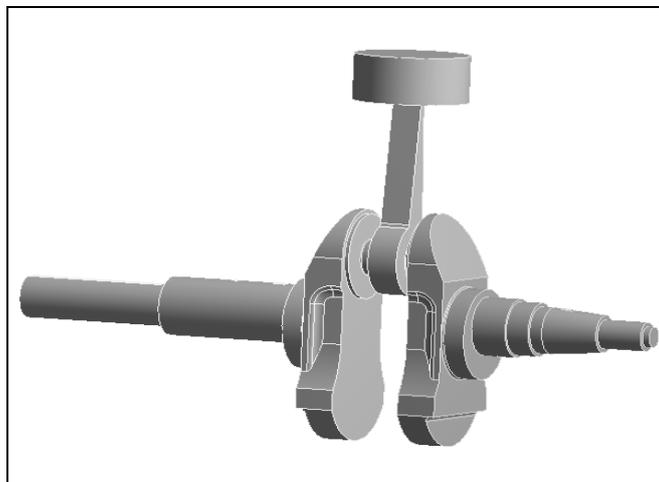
Model of the Crankshaft as per Standard Dimensions.
